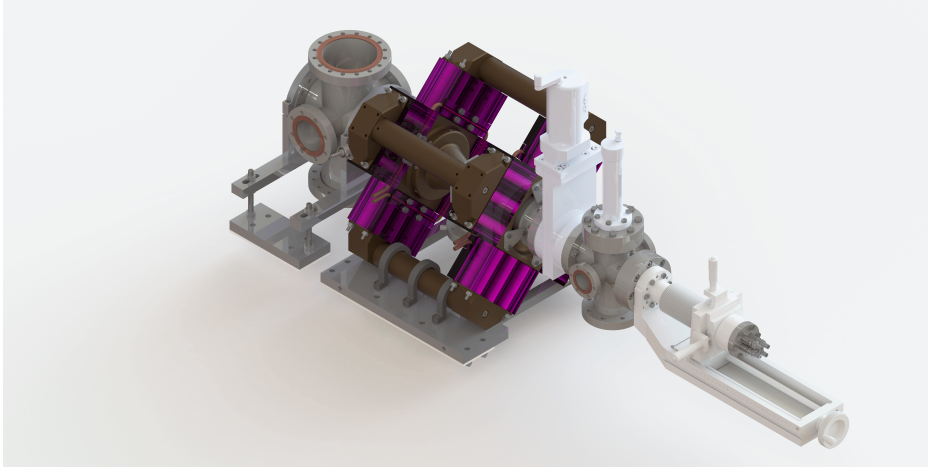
Vacuum chambers and magnetic system of a HC-EBIT rendered in solid works. From top left to bottom right: Collector chamber — magnetic system (purple/brown) enclosing the drift tube chamber — gun valve — gun chamber — gun manipulator. The magnetic system is made of two main components: soft iron yokes (brown) and permanent magnets housed in aluminium cartridges (purple). The cartridges are made translucent in this schematic to show the arrangement of the 72 permanent magnets.
